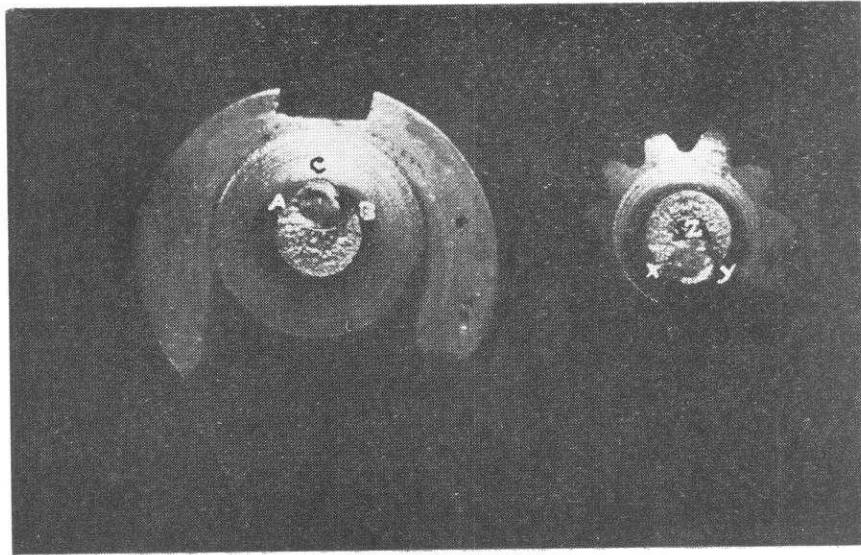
Fracture face of Fig. 3 showing fatigue failure,
